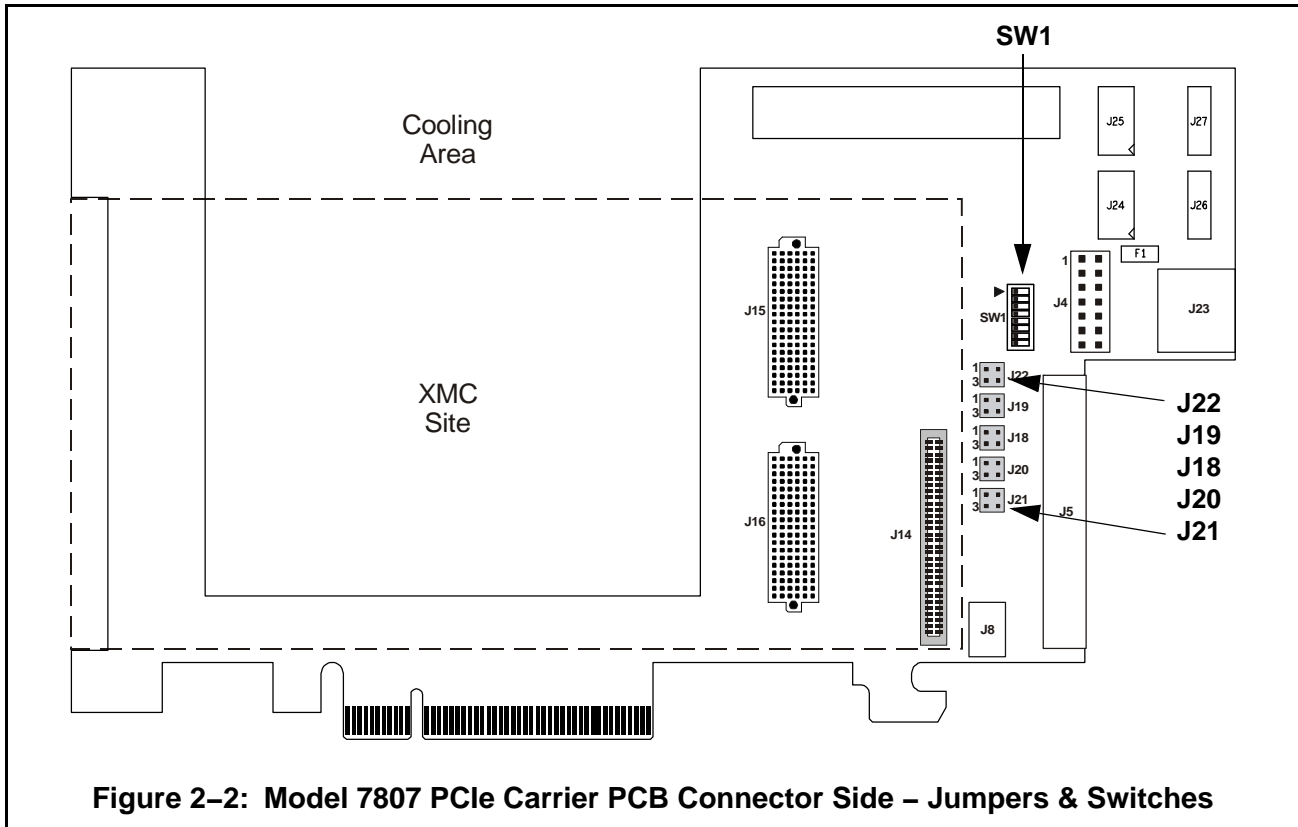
Model 7807 PCIe Carrier PCB Connector Side – Jumpers & Switches
